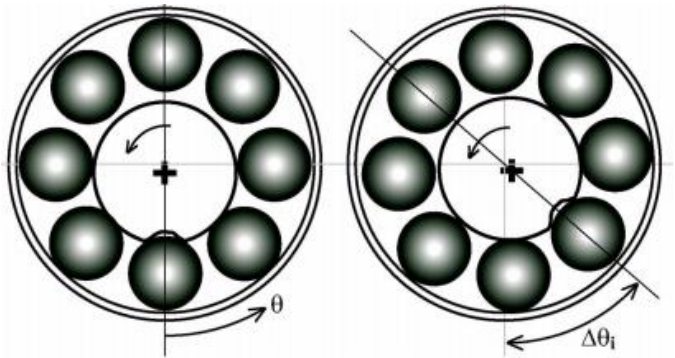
Radial rotor movement due to an inner bearing raceway defect
